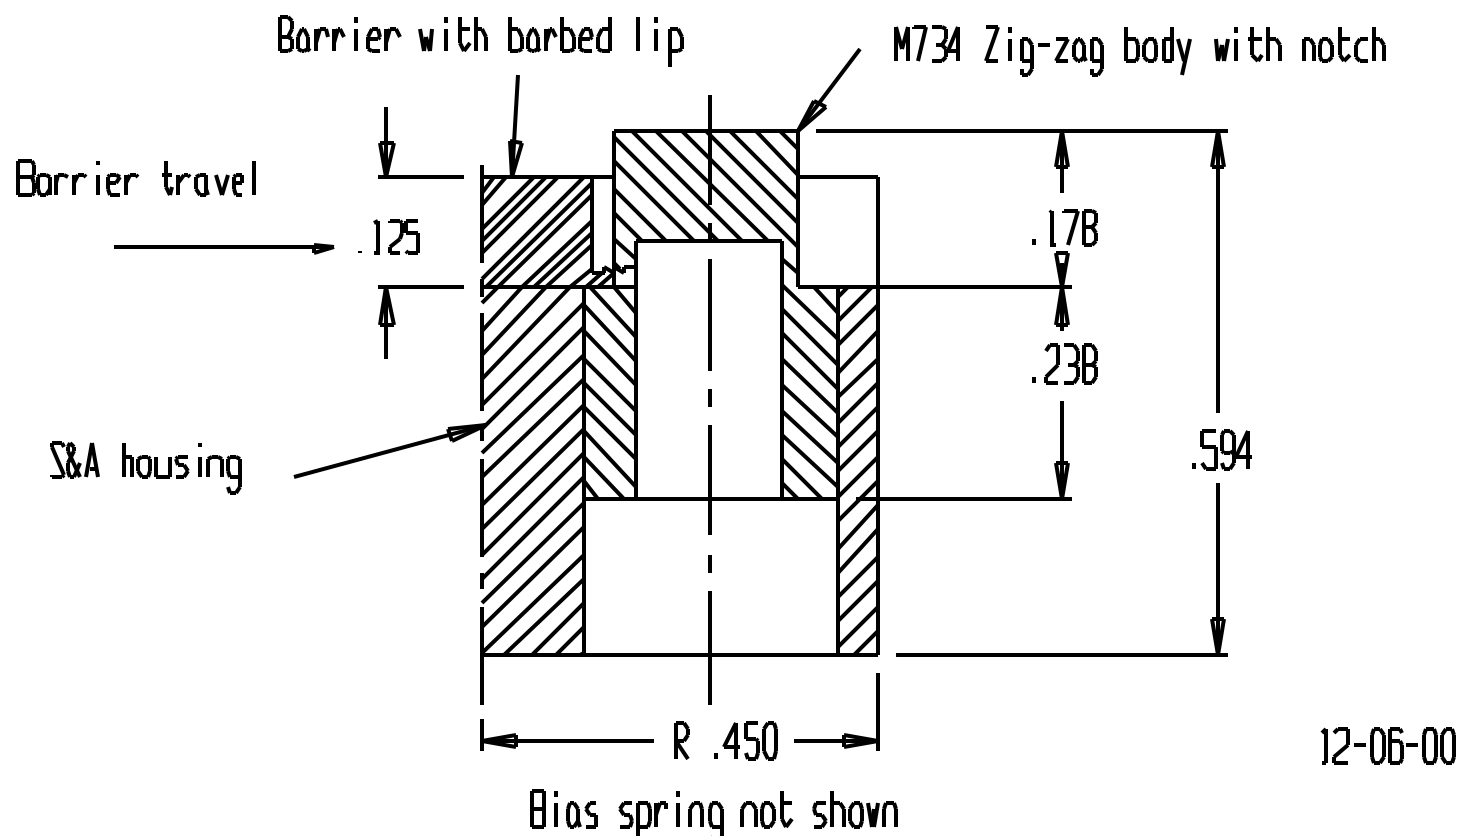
Half-Section of Fail-Safe Latching Barrier
